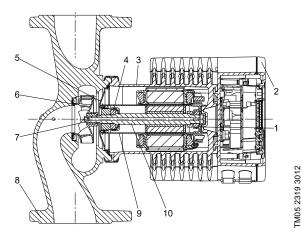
MAGNA1 flanged version with PPS-composite rotor can
